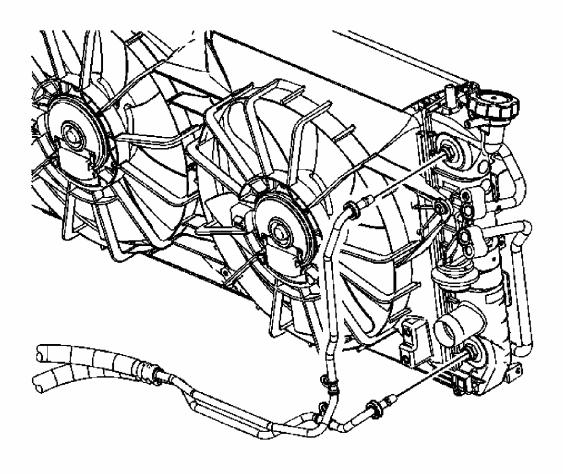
Removing/Installing Transmission Oil Cooler Lines Courtesy of GENERAL MOTORS CORP.
